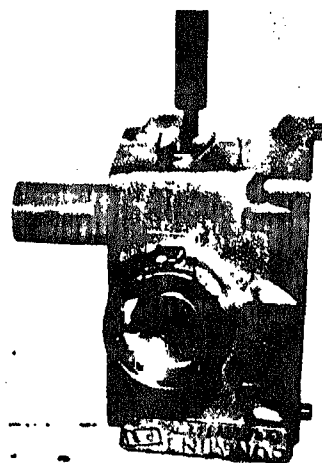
Installing spring dowel in bottom of fuel pump housing
